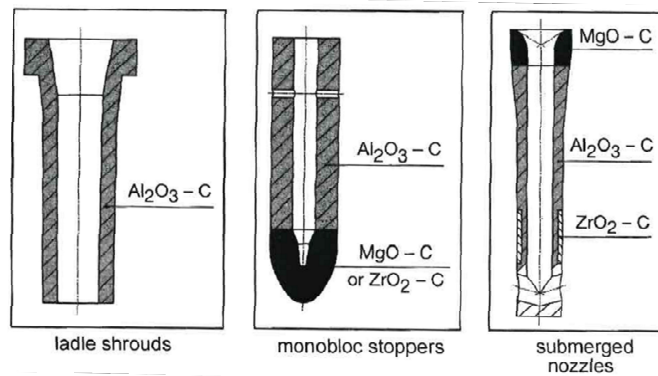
Schematic drawings of isostatically pressed refractory parts for the continuous casting of steel, including the most typical materials of these products. [2]
